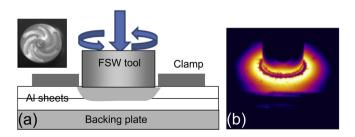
(a) Schematic diagram of the friction stir spot welding process with a pinless tool and (b) thermal image obtained during welding with a 1 s dwell time. The design of the tool is shown in the inset.
